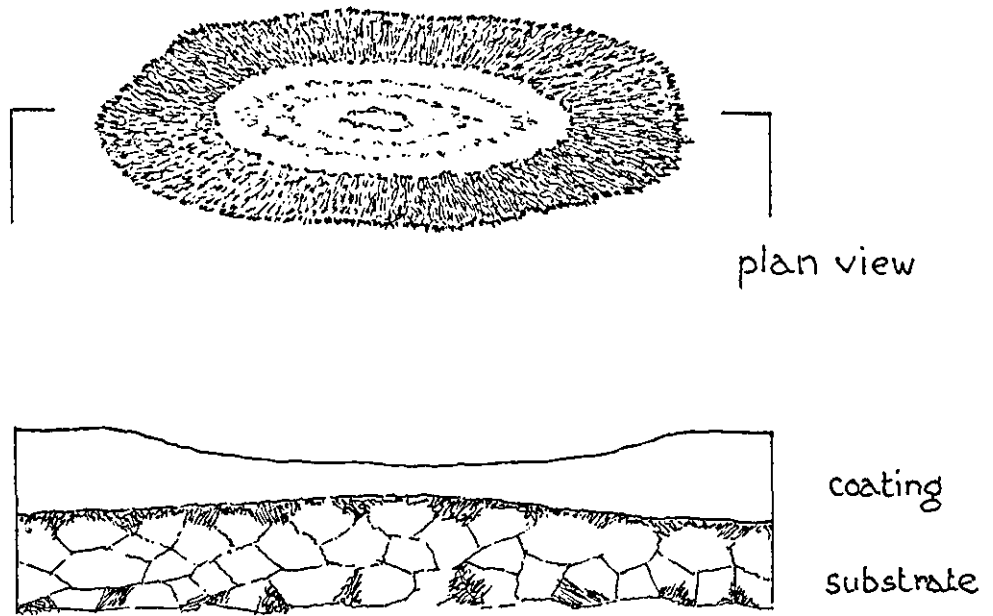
Effect on coating of two parts in physical contact during chromising. The centre sections may even weld together. Actual shape will vary.
